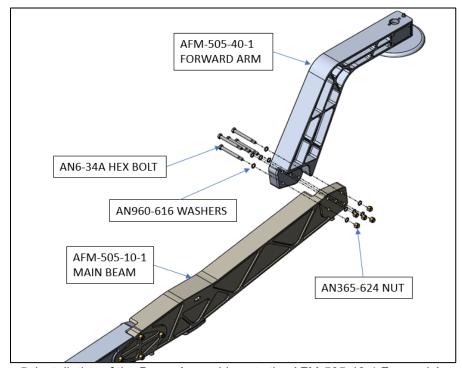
Installation of the Beam Assembly onto the AFM-505-40-1 Forward Arm Assembly.
